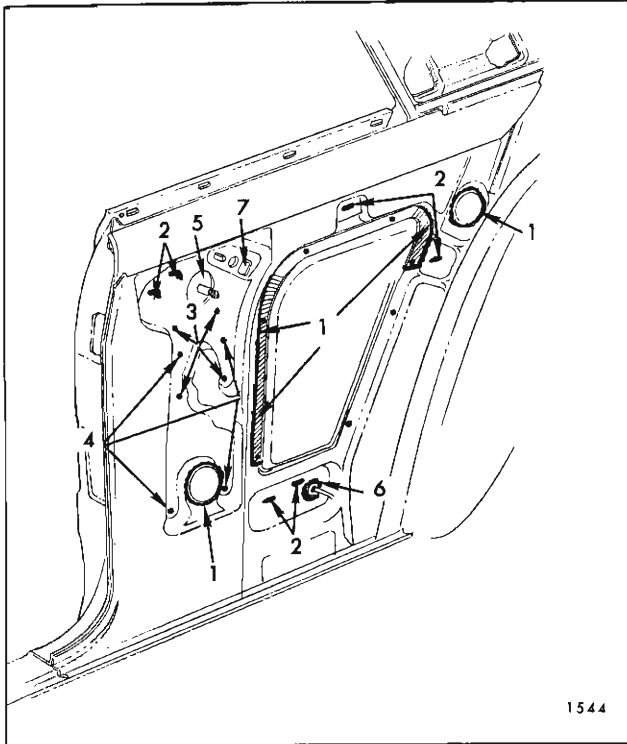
E12—Rear Quarter Inner Panel Sealing - "37" Styles
